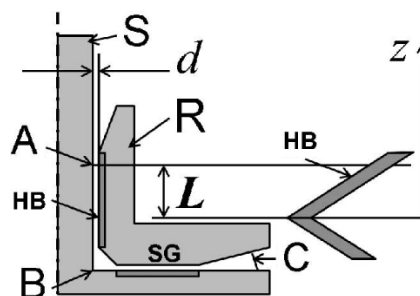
Cross section of a tied-shaft fluid dynamic bearing. The journal bearing extends from A to B. The thrust bearing extends from B to C. The oil-air interface under study is at A. R: rotor; S: stator; d: bearing radial clearance.
